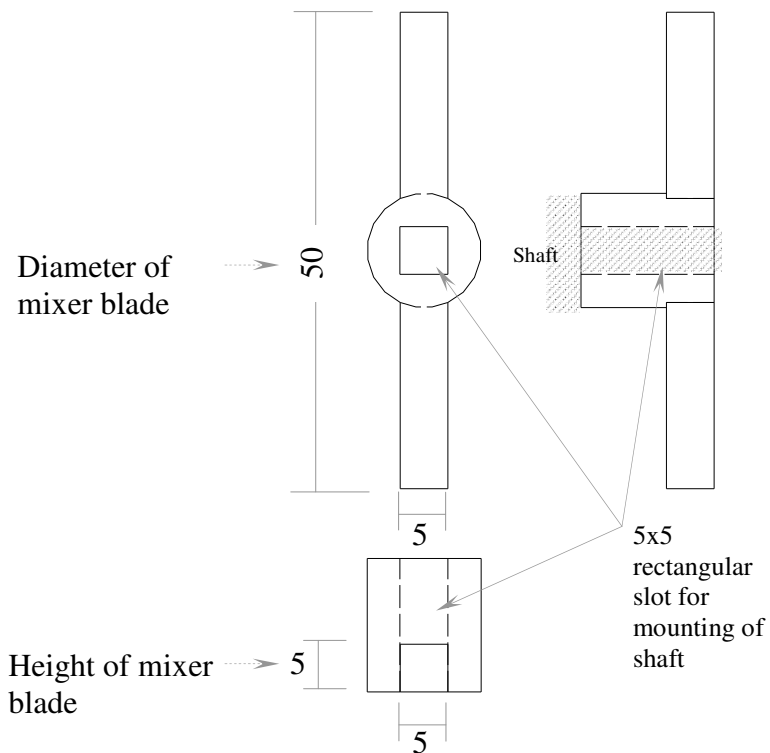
Schematic of 90° blade for DM installer A (all dimensions in mm).
